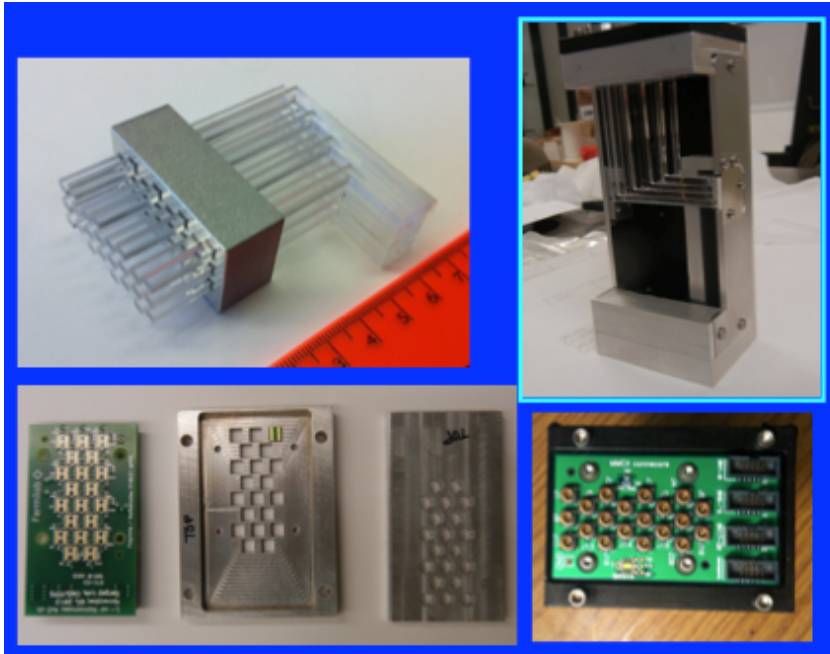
Parts of 20-channel QUARTIC module. Top left: Quartz bars in mounting jig (removed during assembly). Bottom left: Readout board showing connectors to SiPMs, SiPM-holder plate, light-guide holding plate. Bottom right: Connectors for signals, LV and monitoring. Top right: Assembled module with (100 μm) sideplate removed.
